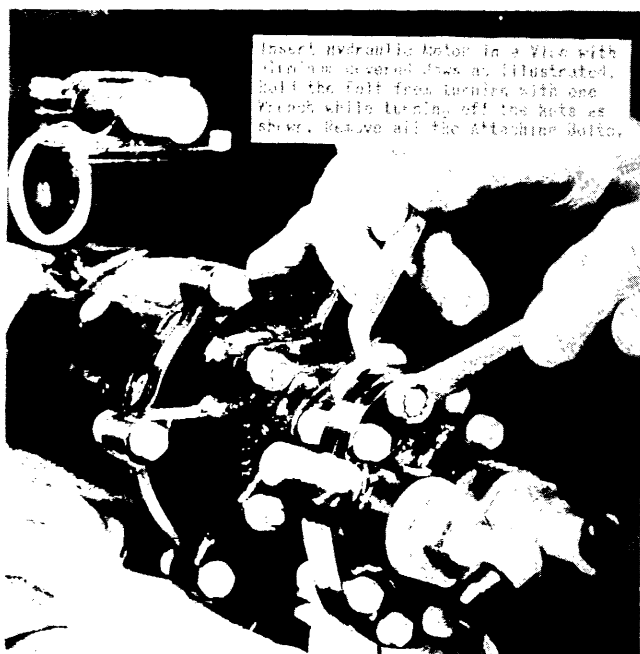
Removing Bolts to Separate Hydraulic Pump Unit
